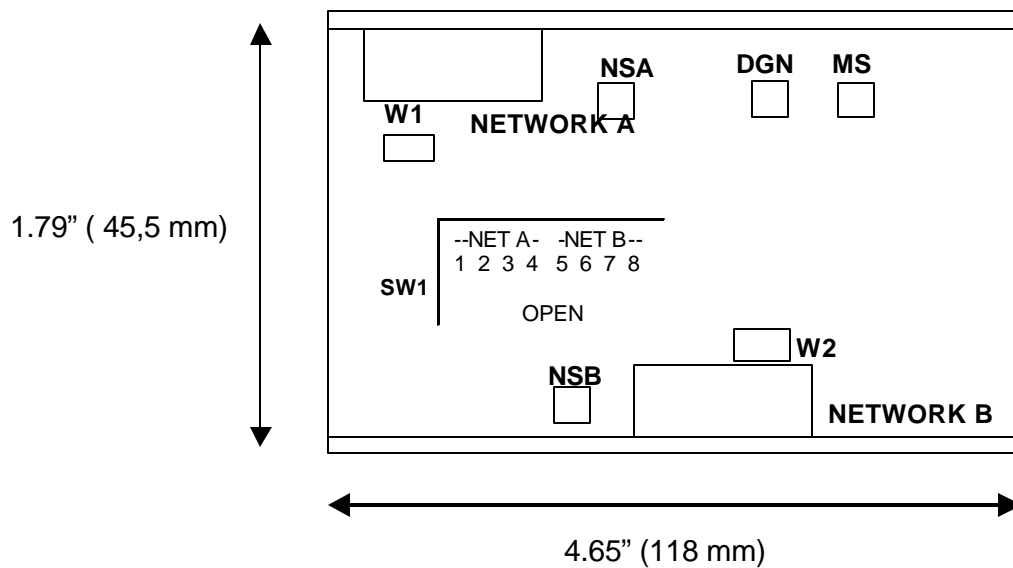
WRC-CANX-DIN Series 3 Dimensional Drawing
